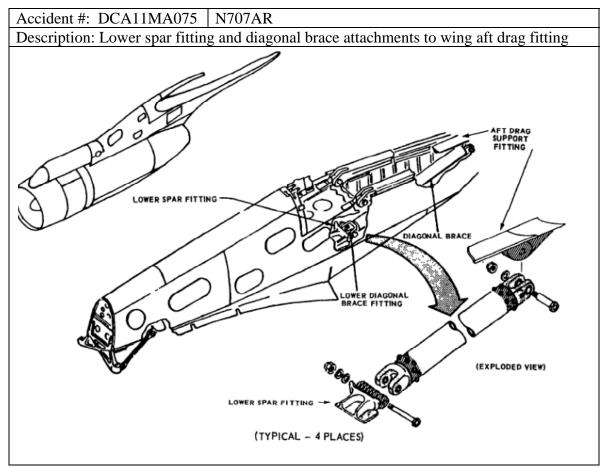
Lower spar fitting and diagonal brace attachments to wing aft drag fitting
